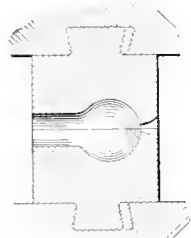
Type of Die for Forming the End of a Ball Crank.
